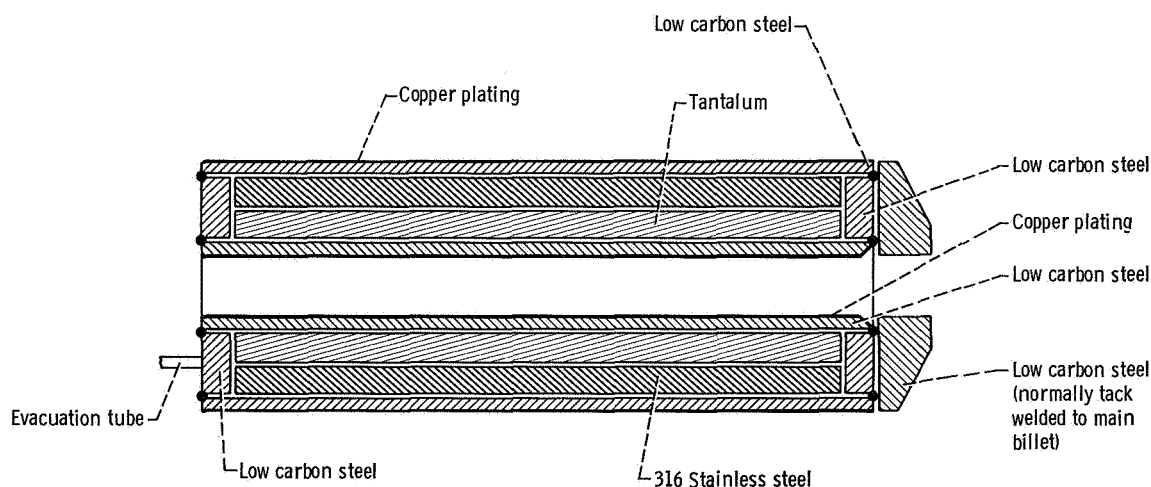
Extrusion billet design for producing tantalum/316 stainless steel tubing using a mandrel extrusion method.
